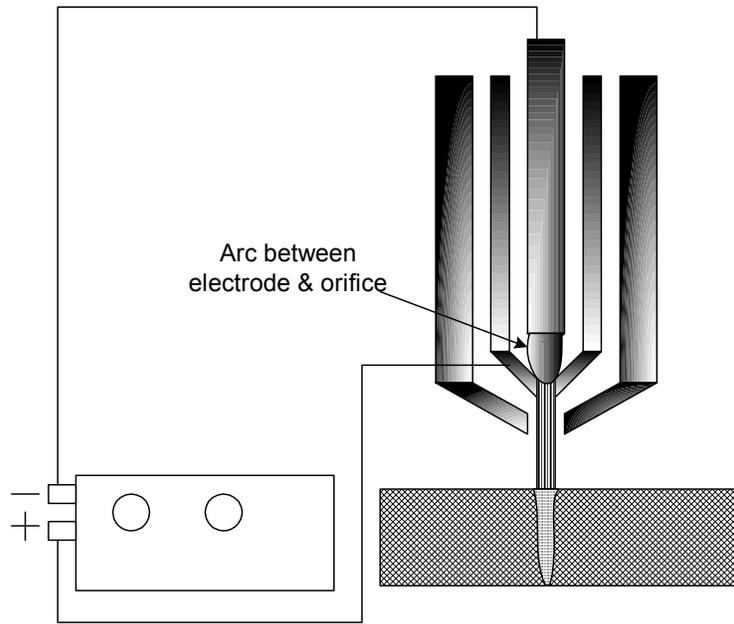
Schematic of plasma arc welding system showing important components
